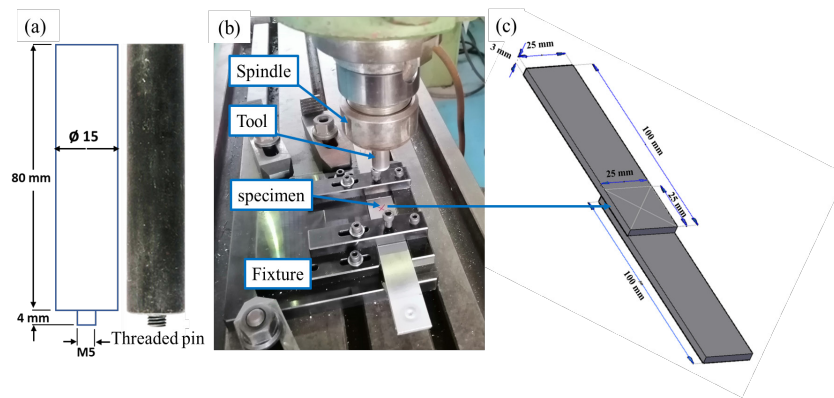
Set-up of the experimental welding and tensile test
